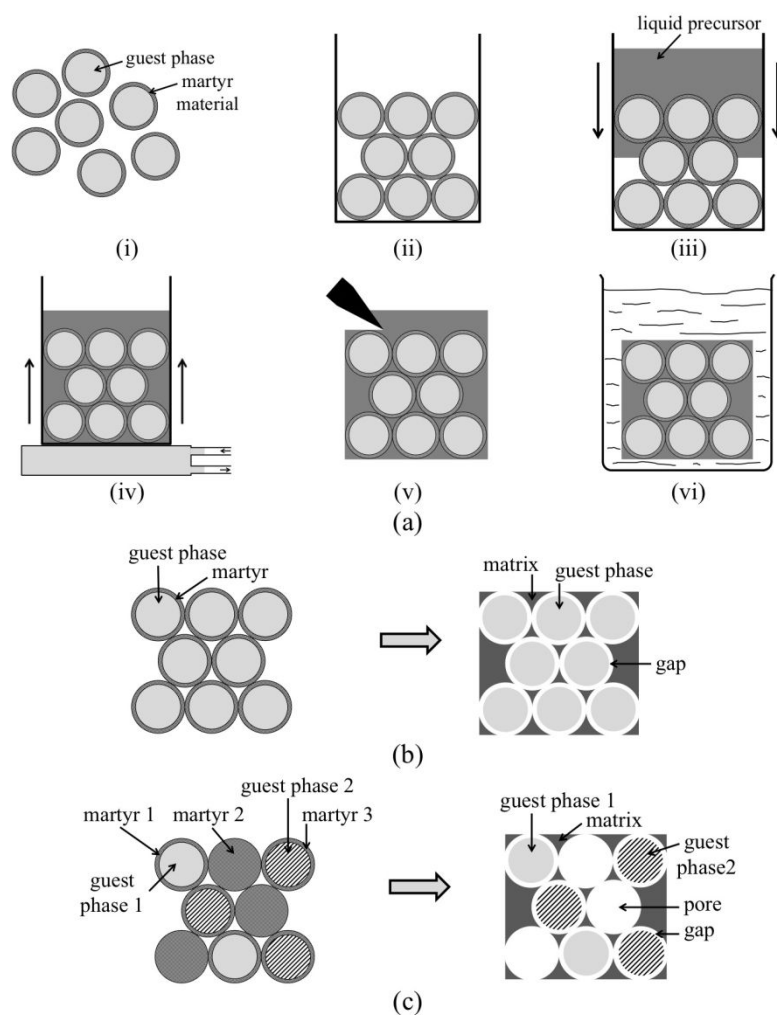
(a) Manufacturing steps of Guefoams: (i) selection and coating of guest phases; (ii) packaging; (iii) infiltration with liquid precursor; (iv) directional solidification; (v) machining; (vi) removal of martyr material; (b) Guefoam with guest loading of 100% of one type of guest phase; (c) Guefoam with guest loading < 100% of two types of guest phases.
